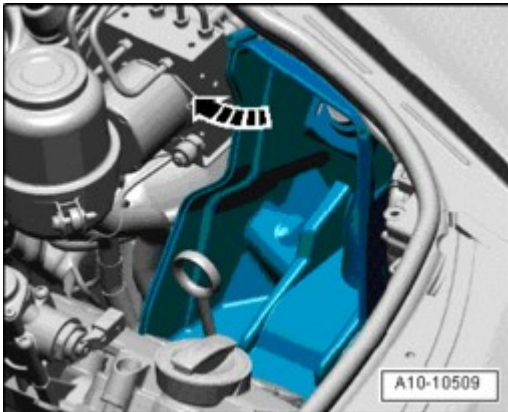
Removing Lower Part Of Air Filter Housing From Side Connection
